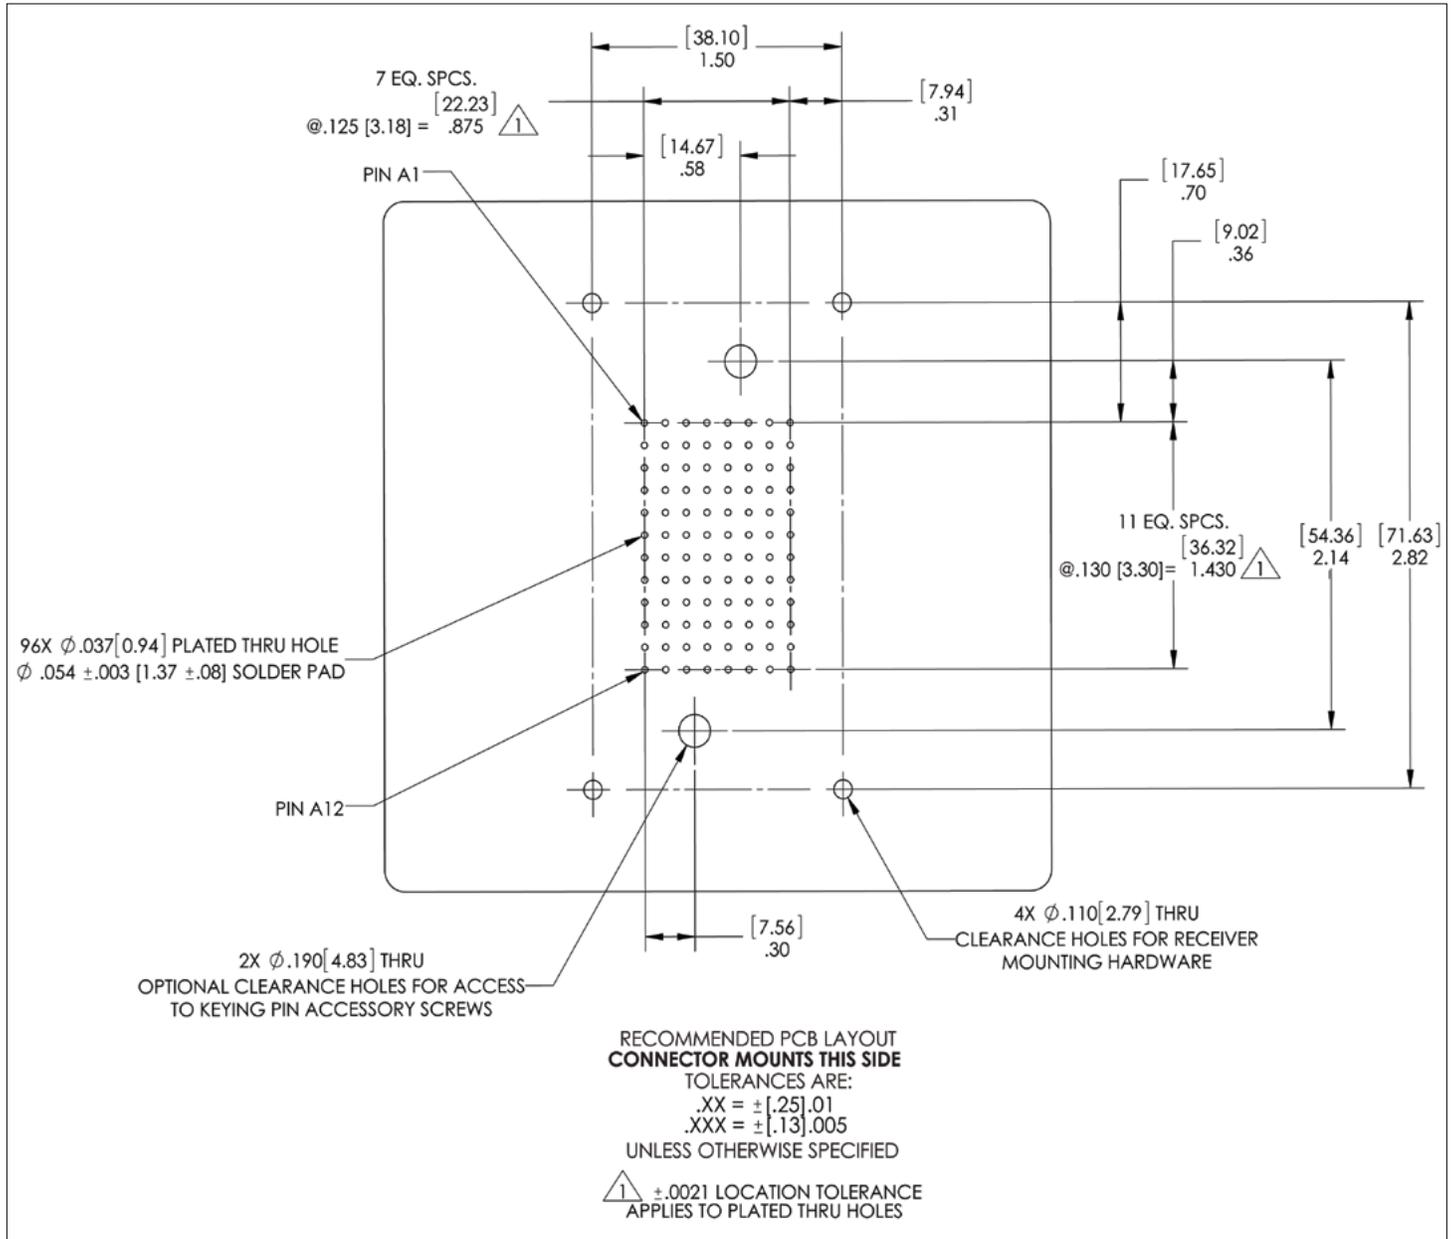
Figure B. PCB layout for the i1 Receiver, Part #310 128 101 loaded with a 510 160 106 module, and for Micro Power contacts, Part #610 142 102. The size of these holes may be different if a header from a different manufacturer is used. Also shown are optional clearance holes.
